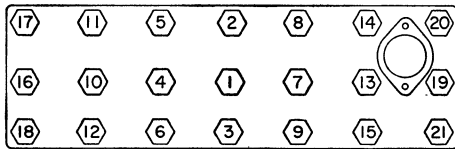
Cylinder head tightening sequence. Six-cylinder engines with 21-bolt head
